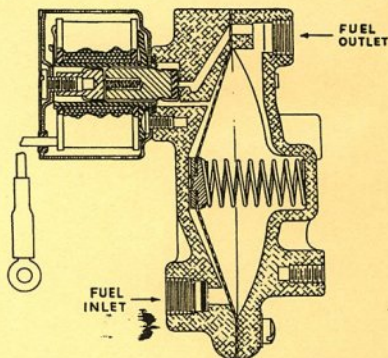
SECTIONAL VIEW OF FUEL SAFETY VALVE
